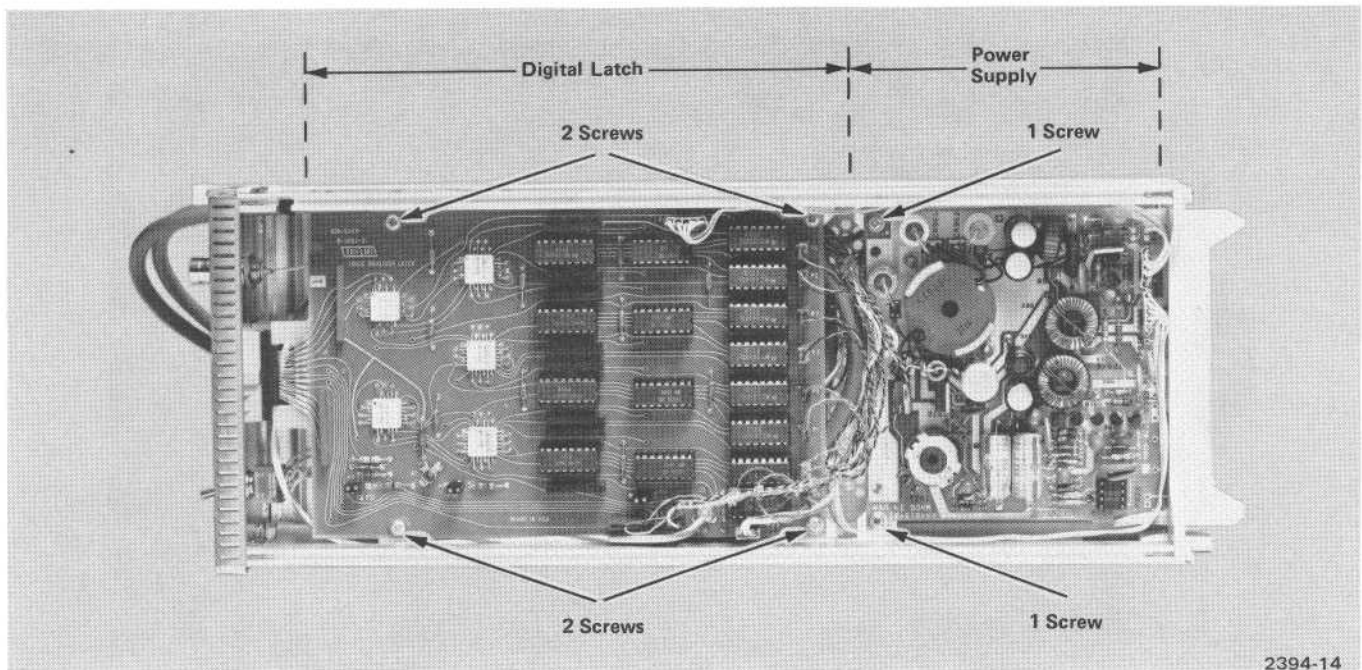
Digital Latch and Power Supply circuit boards.
